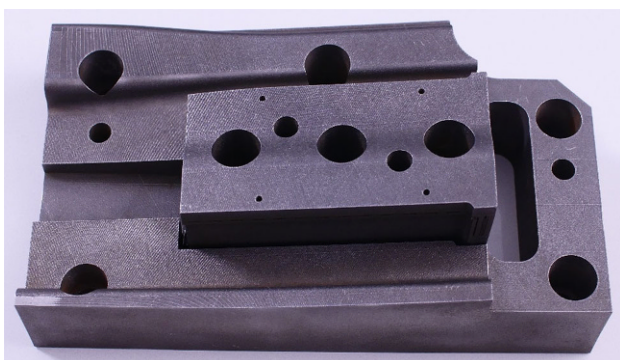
The 3D-printed puller and punch in the progressive die. Material = DIN 1.2709. The inner structure is not solid. Both the puller and the punch are 3D-printed with a honeycomb inner structure (shown in Fig. 13). (See also [9])
